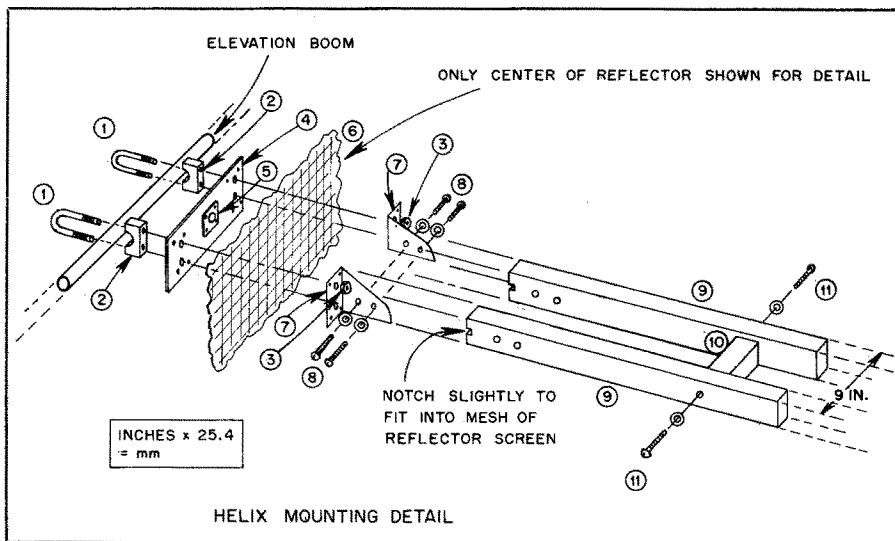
The details of the helix-mounting arrangement. See Table 1 for a number-keyed parts list.
